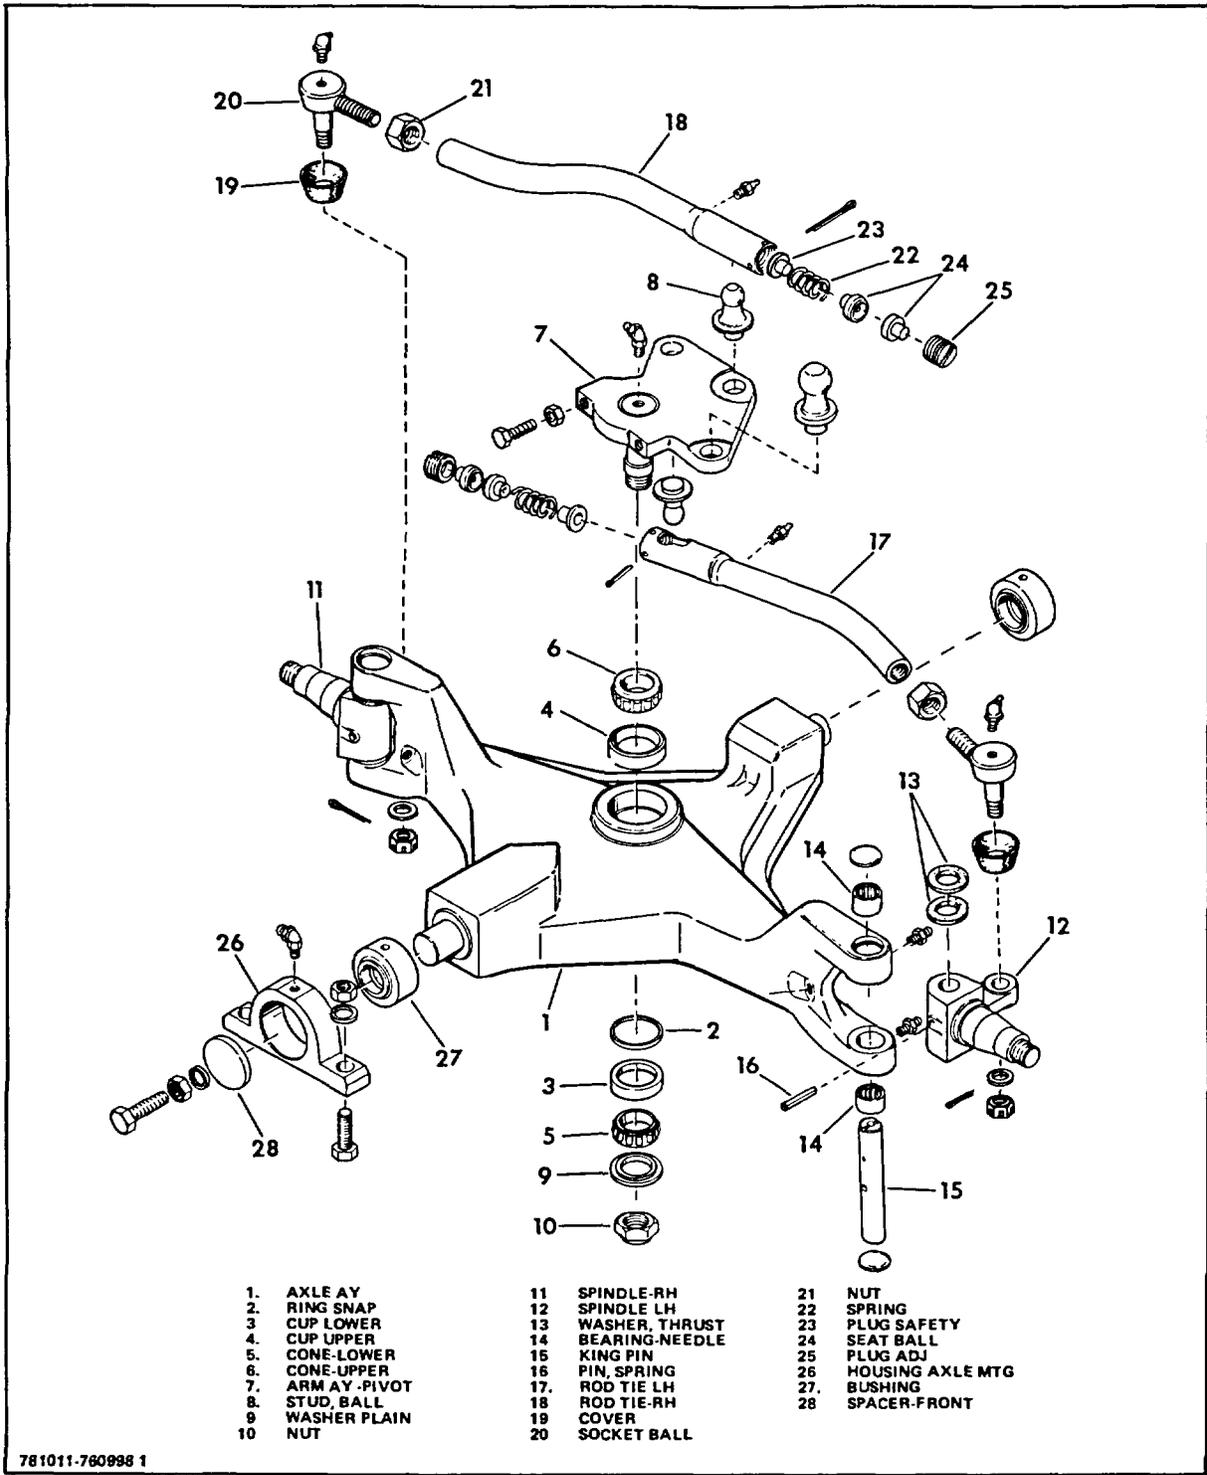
Steer Axle Assembly (ACC 60-80)
